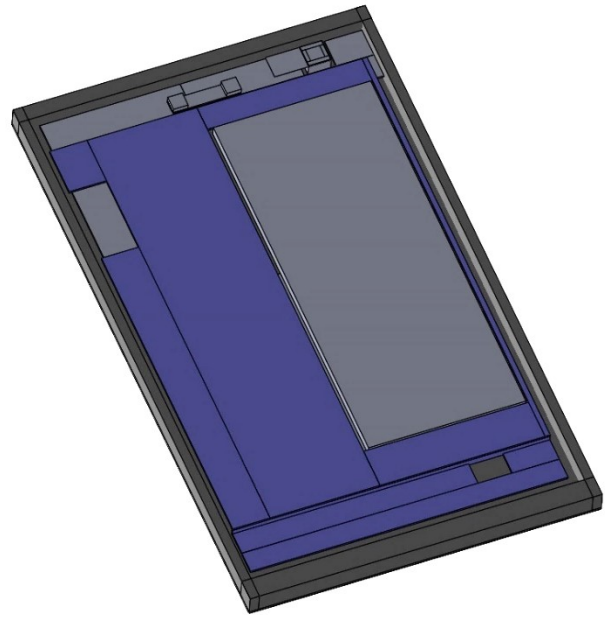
Orthographic view of the tablet model with display assembly removed.
